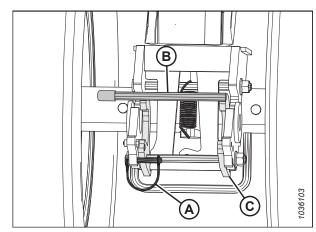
Left Transport Wheels – Rotation Lock Latch Disengaged
